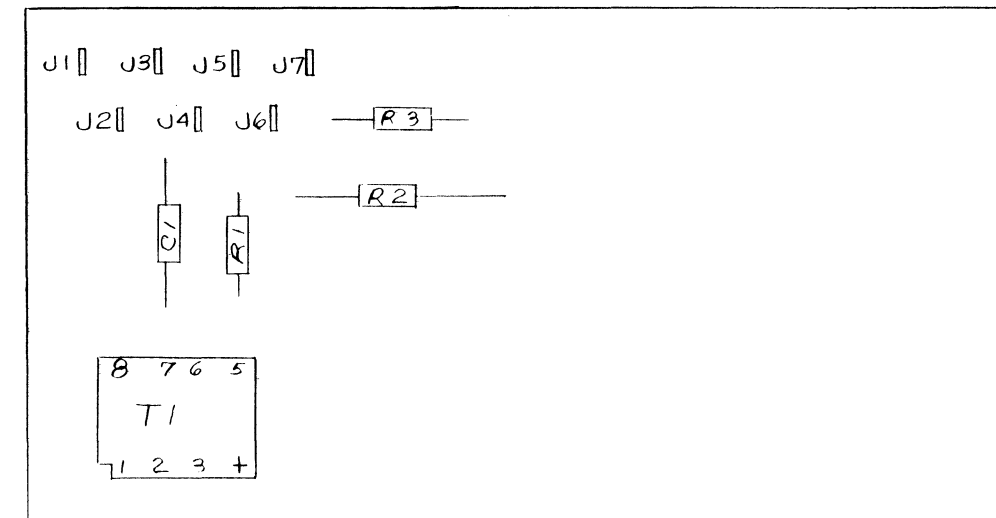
Oscillator Board (12 vdc) Parts Location (837243)
